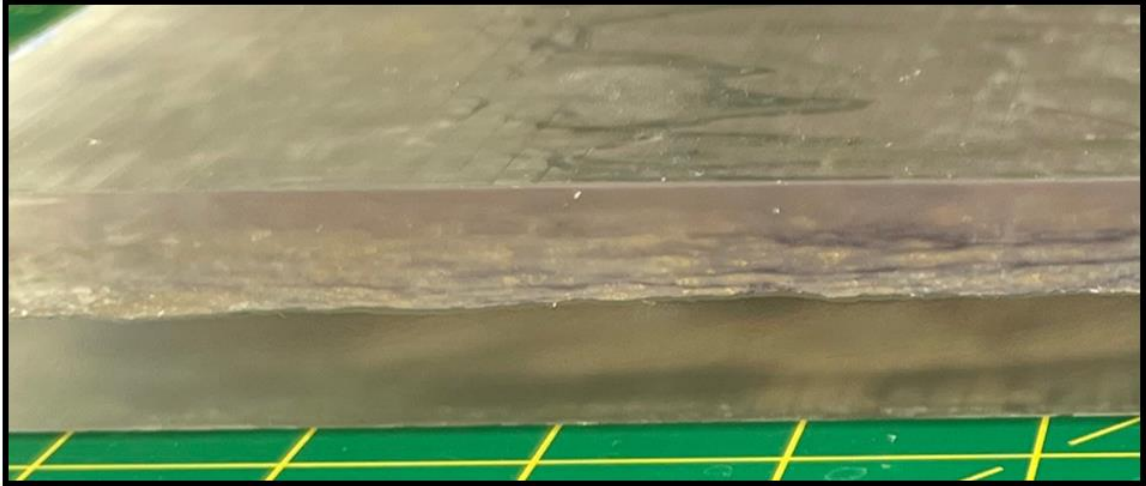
Mirroring Fracture Surfaces Align Precisely
